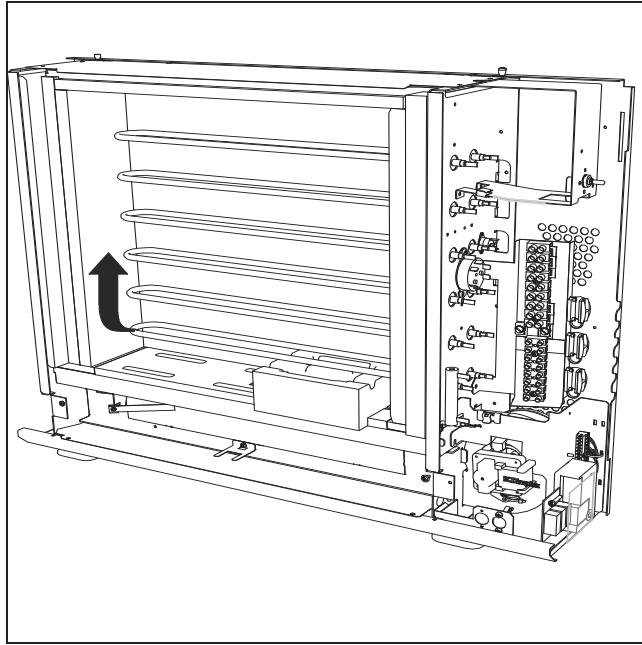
Starting from the control space side, slide bottom layer of bricks under the lowest heating element, raising the element slightly.
